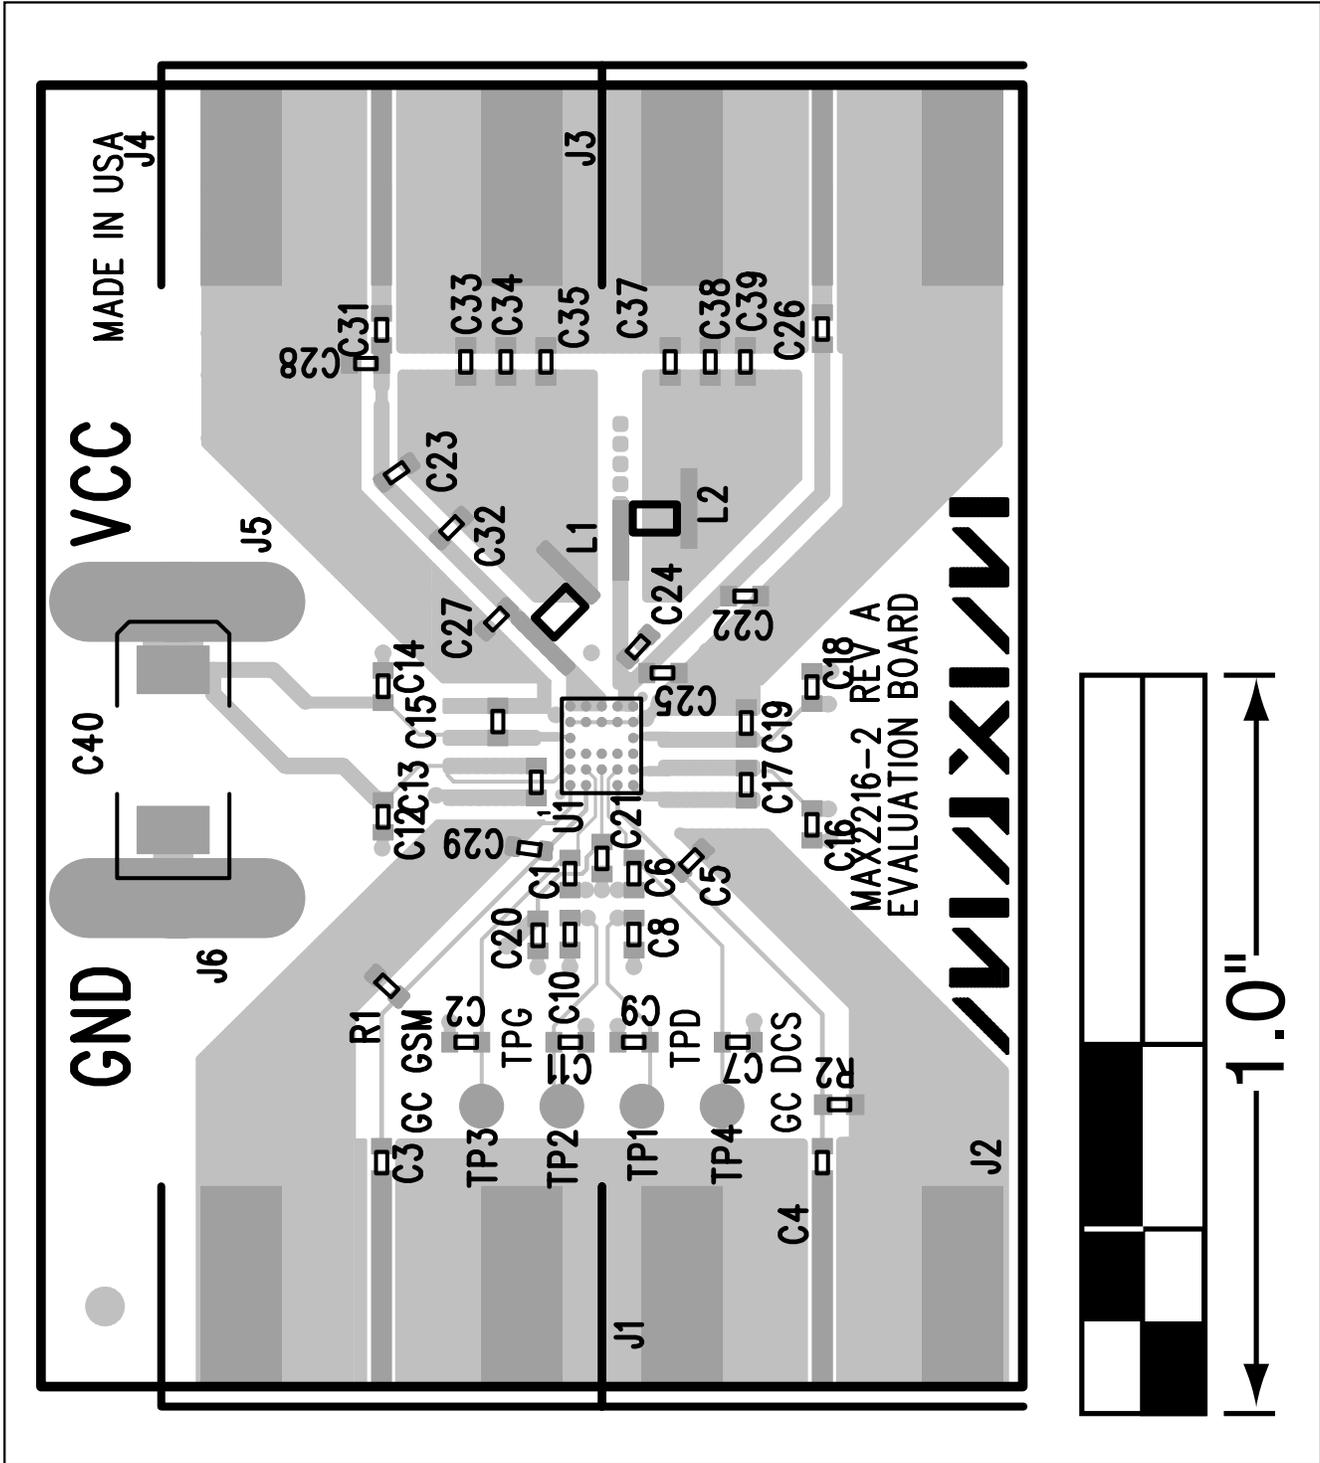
MAX2216 EV Kit PC Board Layout—Component Placement Guide
